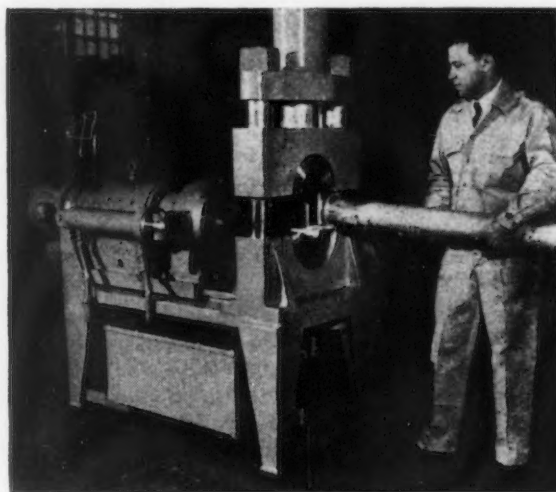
Length of 6-in. lightwall stainless steel tubing is being removed from the portable hydraulic machine used to cold Vanstone piping joints.
